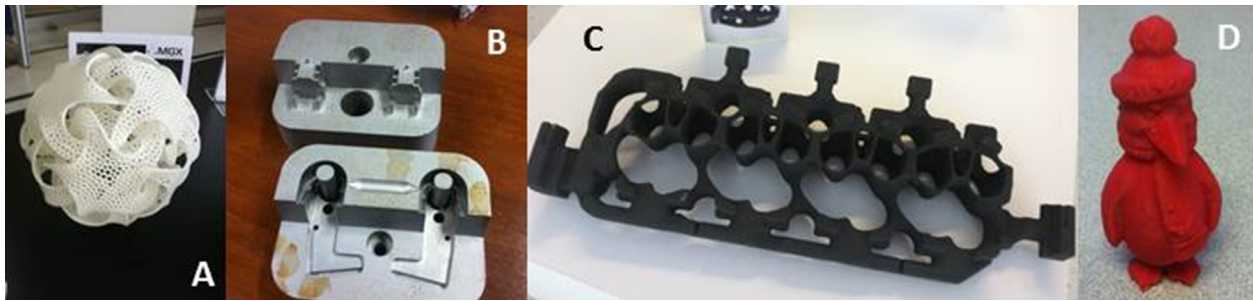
Examples of 3D printed products. (A) A complex decorative piece printed from nylon-11 material using laser based powder bed fusion. (B) Injection molding dies printed out of stainless steel using laser based powder bed fusion. (C) 3D printed automotive cylinder head water jacket sand core printed used binder jetting. (D) A Youngstown State University penguin mascot printed using a desktop material extrusion printer.
